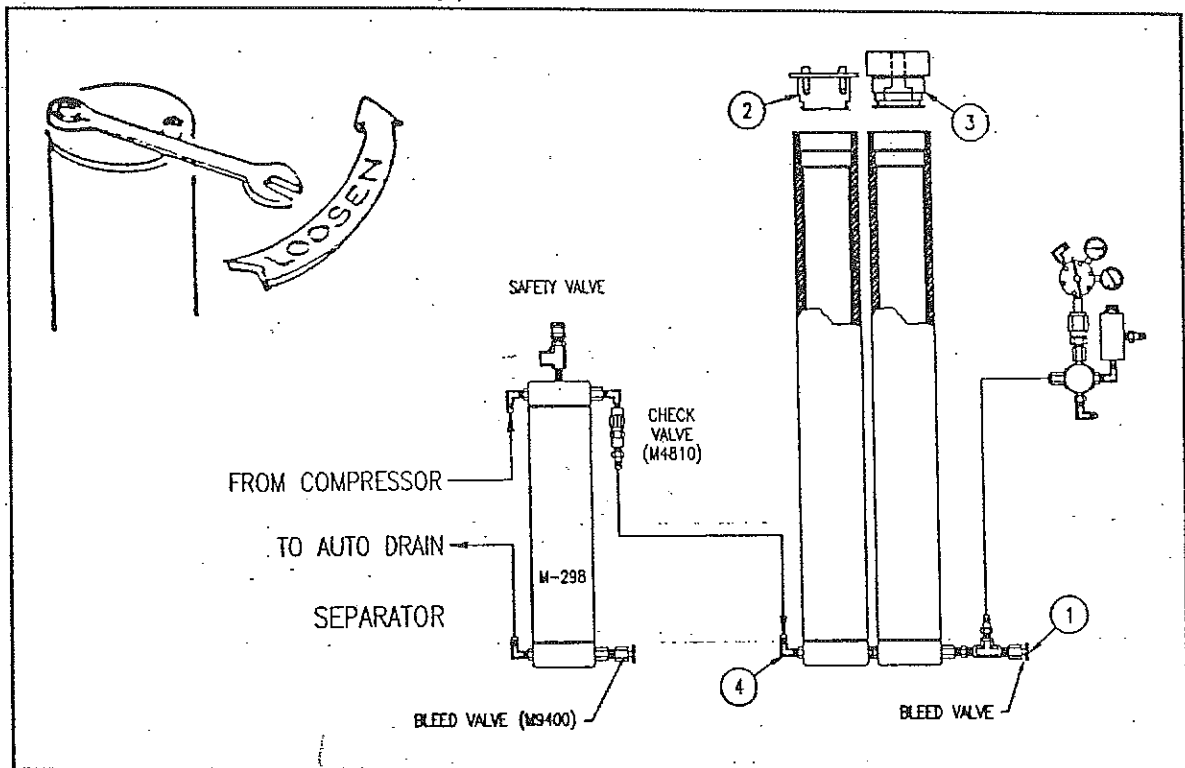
PURIFICATION CHAMBER PLUG REMOVAL
